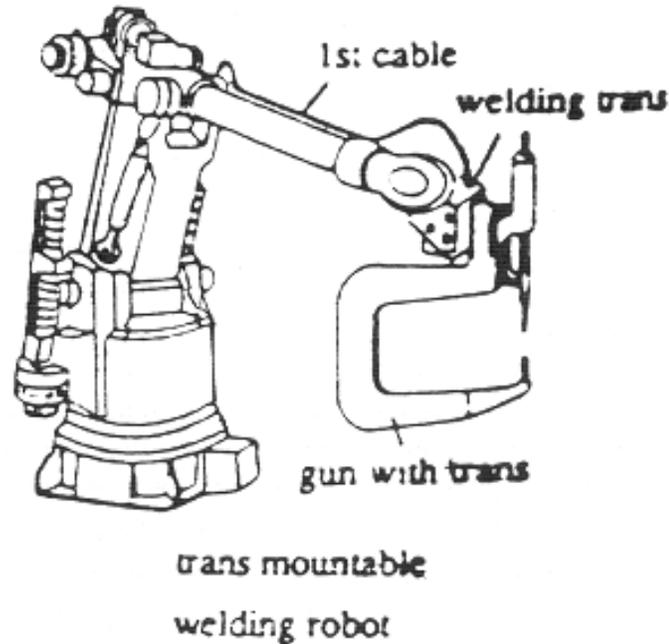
An Improved Version of Spot Welding Robot
